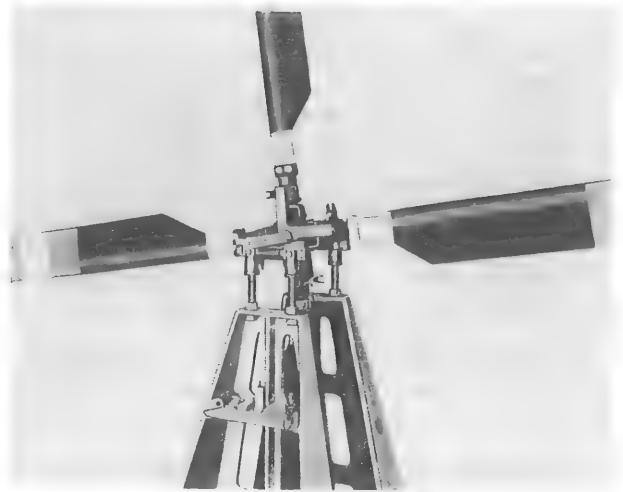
Use Of Tail Rotor Balancing Arbor
